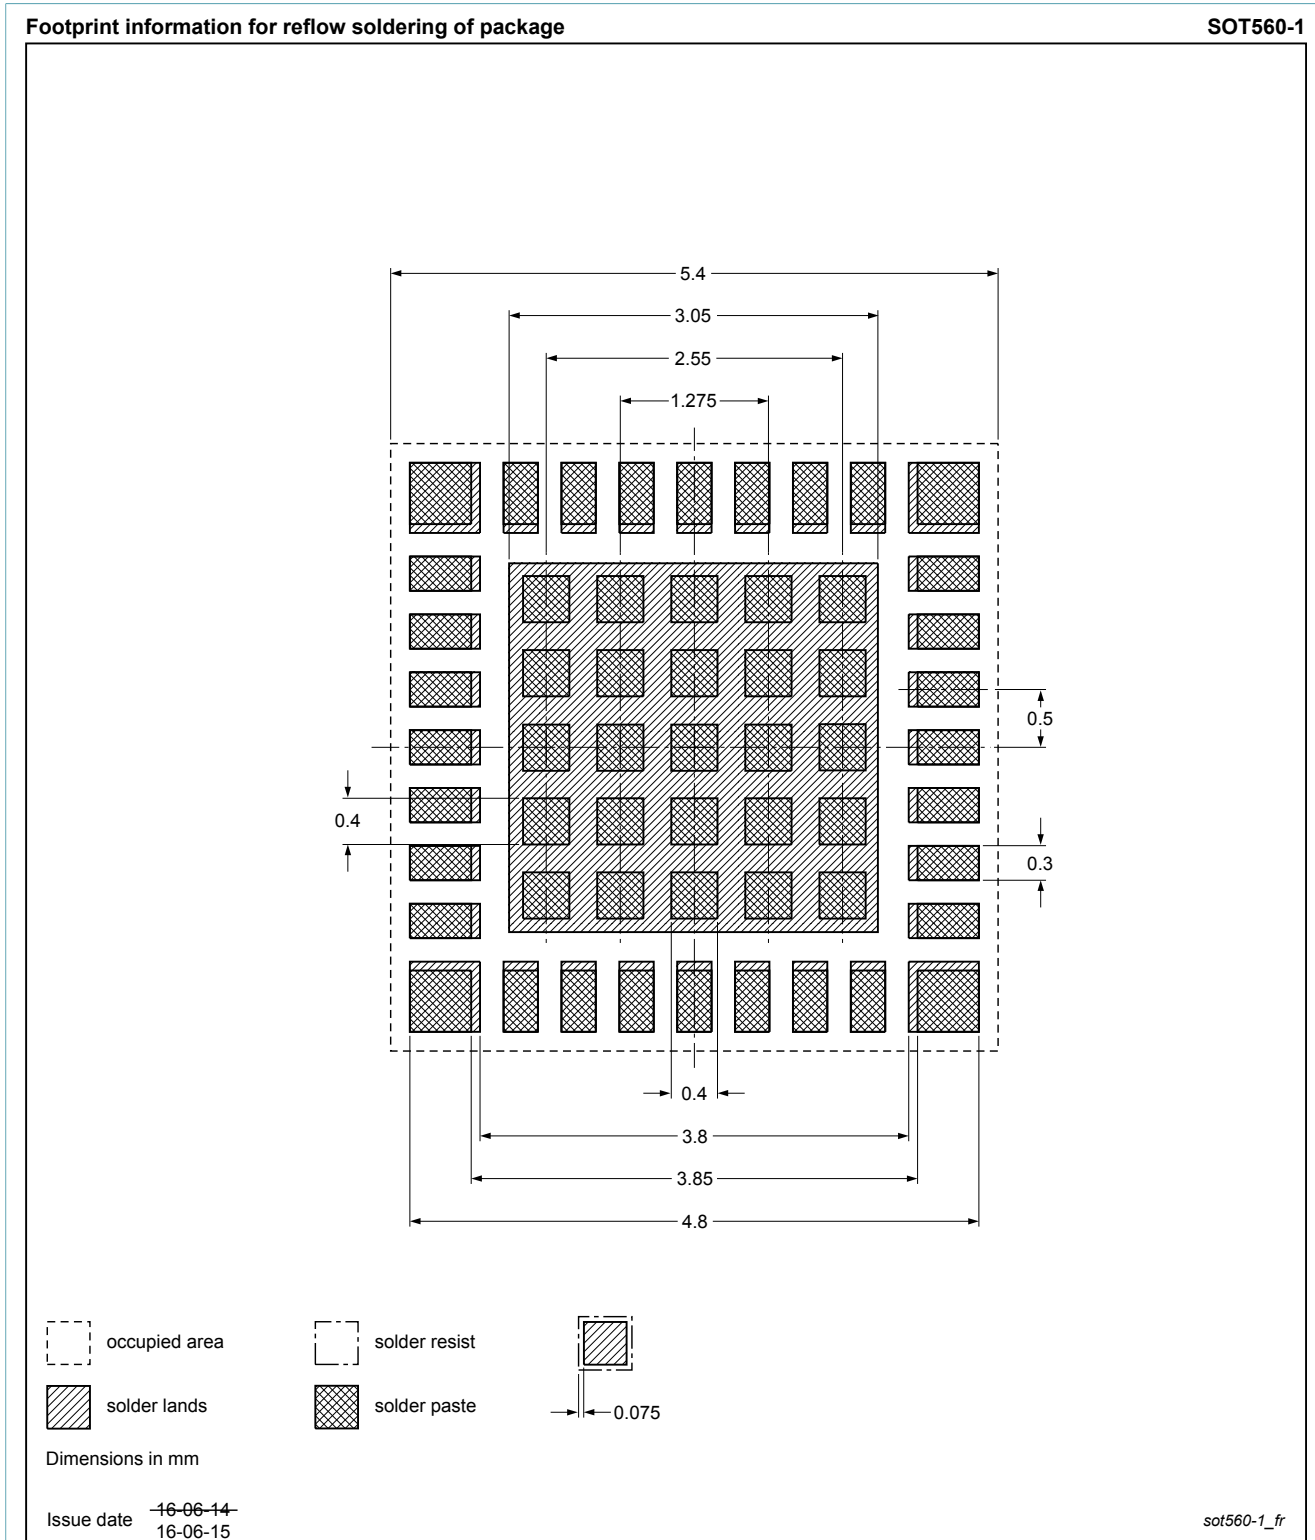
Reflow soldering footprint for HBCC32 (SOT560-1)
